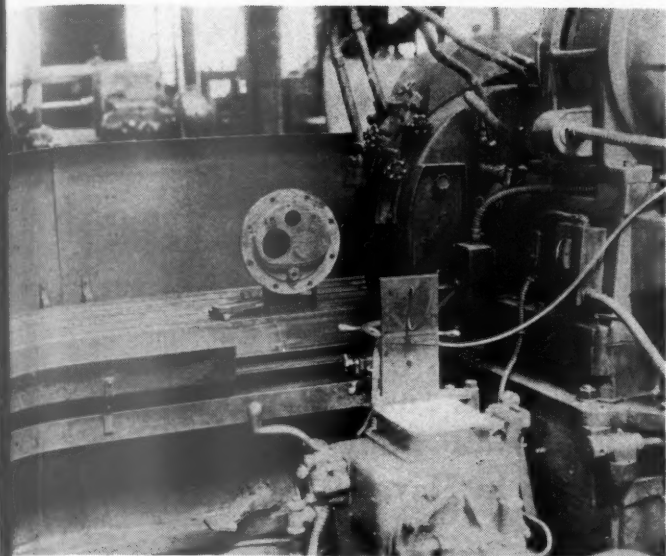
Tender tank well preparatory to finishing flat valve seat
